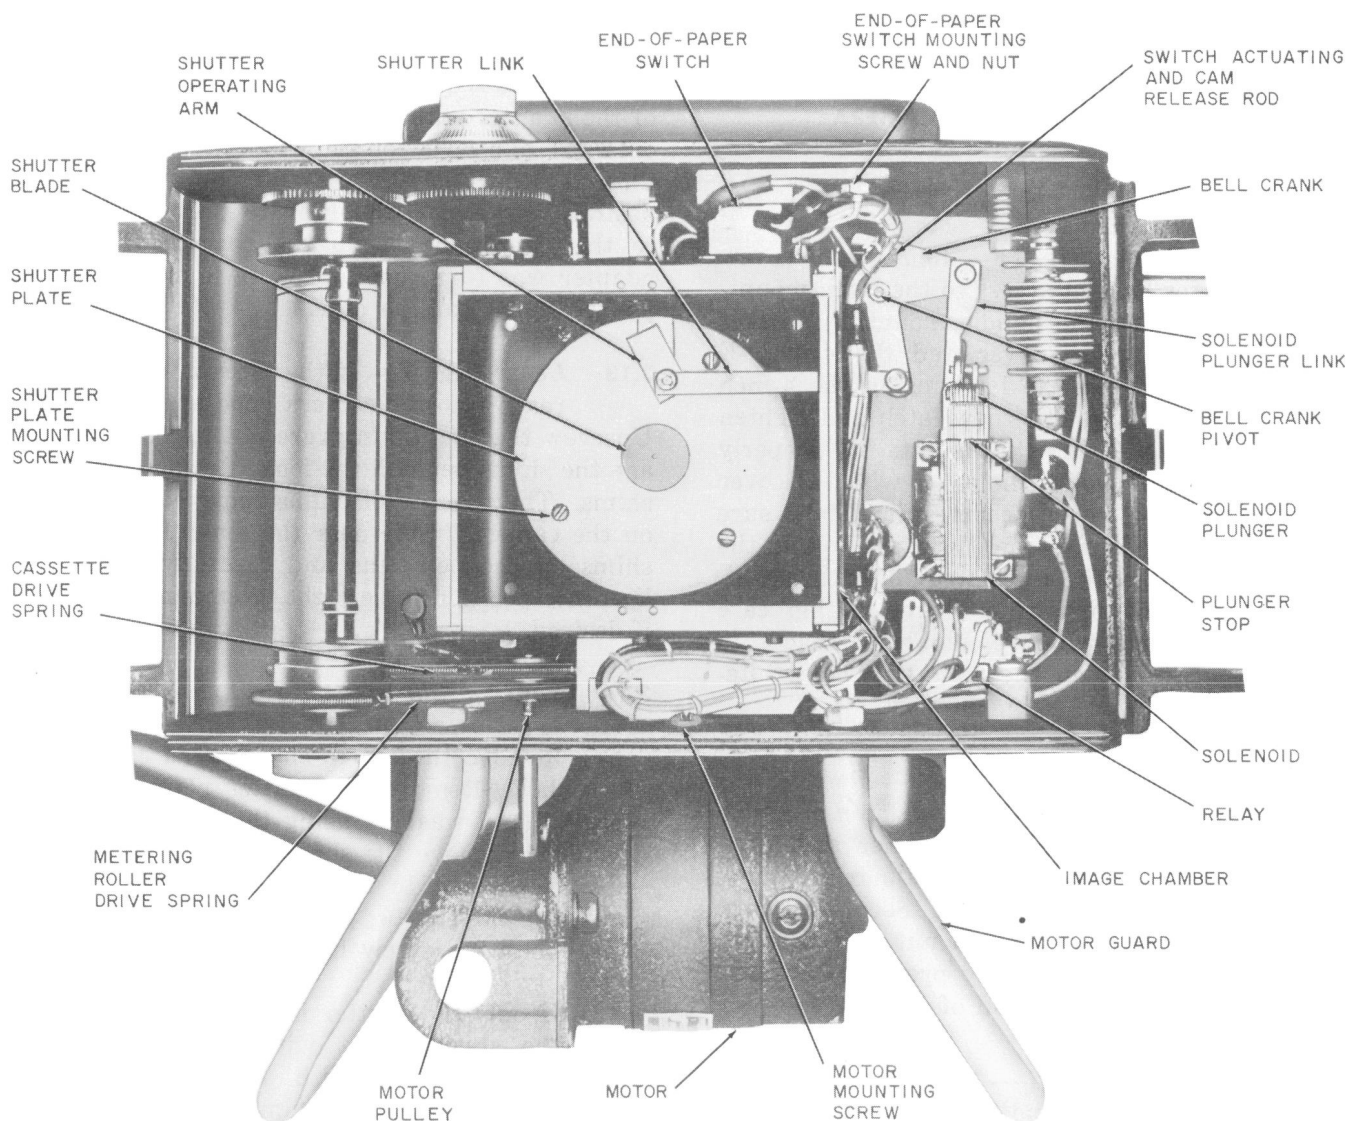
KS-14593 L2 Message Register Camera with Cover Removed
